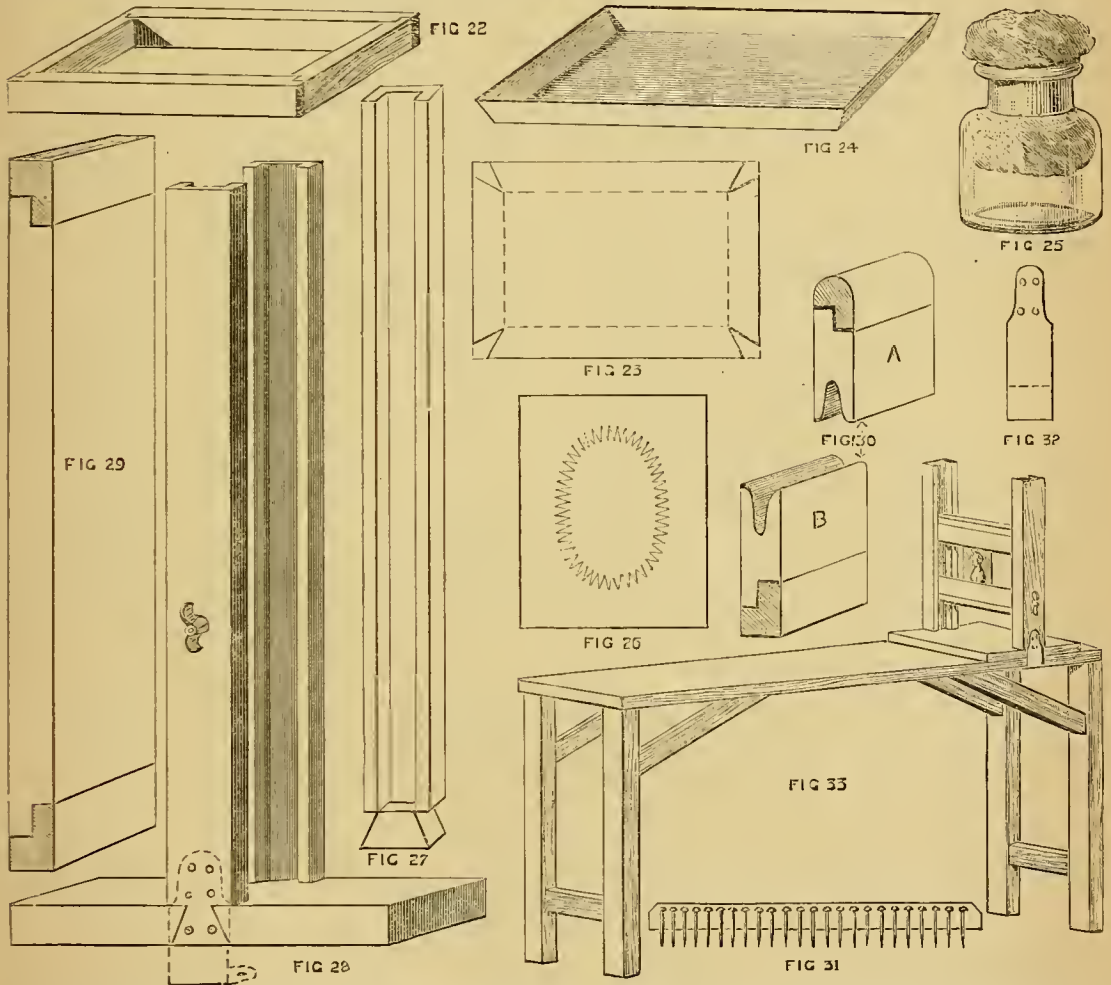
DEVELOPING DISH. FIG. 23.—PLAN OF ZINC DEVELOPING DISH. FIG. 24.—ZINC DEVELOPING DISH COMPLETED. FIG. 25.—SPONGE BRUSH. FIG. 26.—CARDBOARD VIGNETTER. FIG. 27.—UPRIGHT OF EASEL. FIG. 28.—UPRIGHTS MOUNTED. FIG. 29.—BOARD TO SLIDE IN GROOVES OF FRAME. FIG. 30.—PIECES TO SLIDE ALONG GROOVES OF SUPPORTS. FIG. 31.—PINS SOLDERED TO BRASS STRIP TO HOLD PAPER TO EASEL. FIG. 32.—CLAMP. FIG. 33.—ENLARGING BOARD, COMPLETE.
